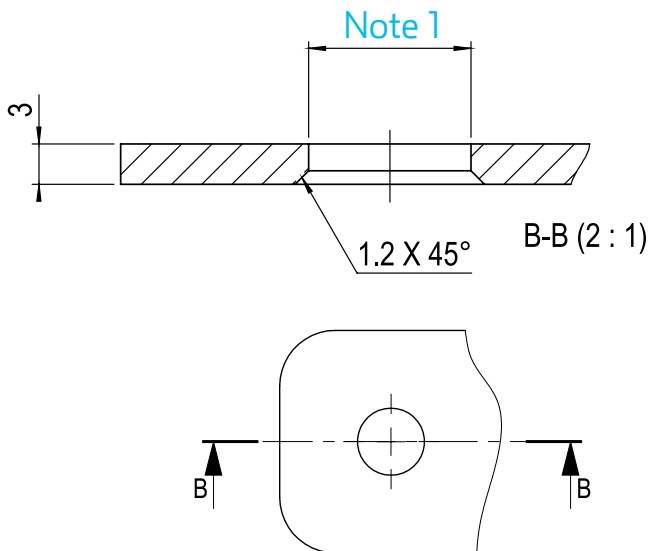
Busbar-SkelCap laser welding assembly
